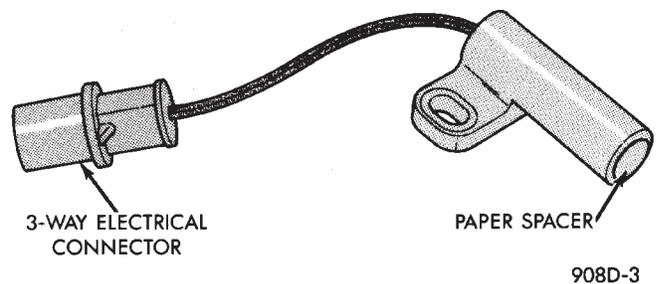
Crankshaft Timing Sensor—3.3L and 3.8L Engines
